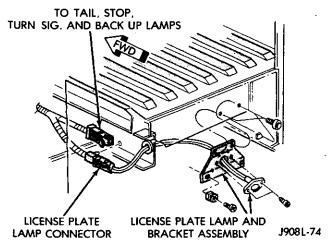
License Plate Lamp Without Rear Bumper HEADLAMP SWITCH
